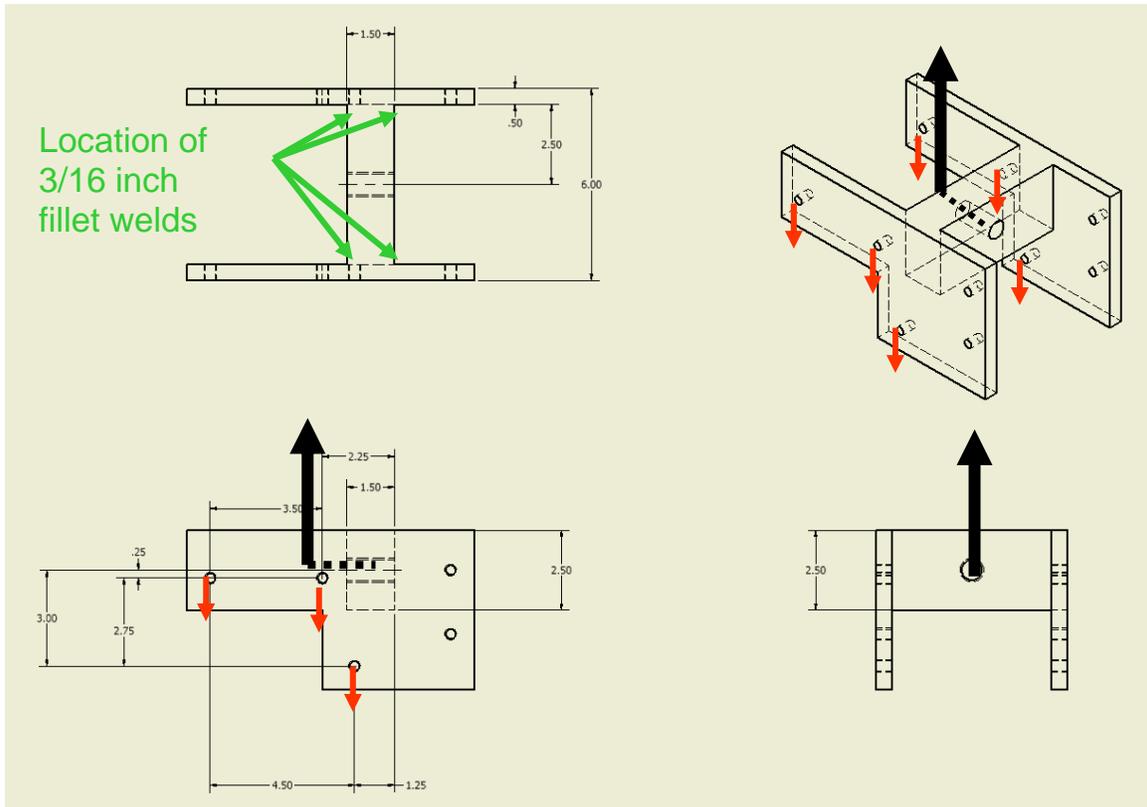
Hanger bracket dimensions and forces. Black arrow depicts eccentric reaction loading through 3/4-10 bolt. Red arrows loading through 3/8-16 bolts.
